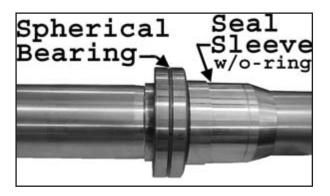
Spherical Bearing and Sleeve shown installed on the Shaft
